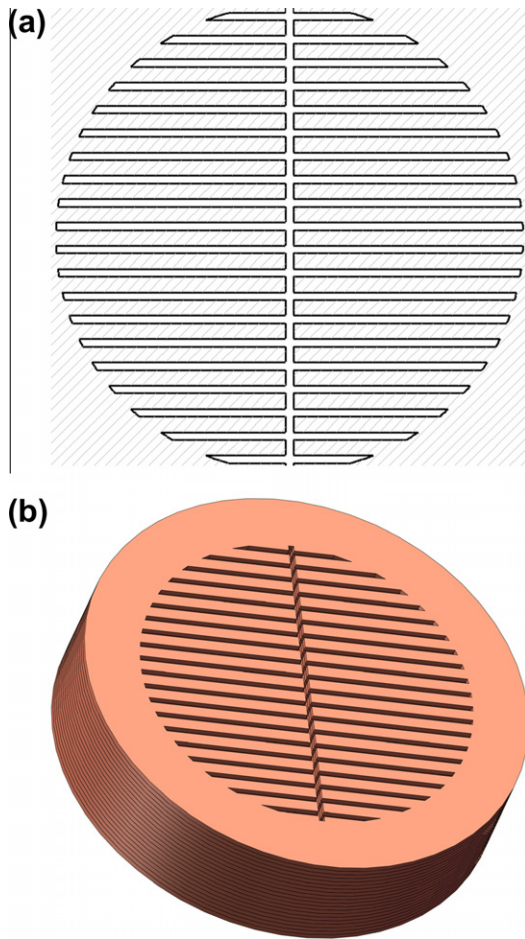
Schematic and assembly drawing of the parallel plate structure. (a) Schematic drawing; (b) assembly drawing.
